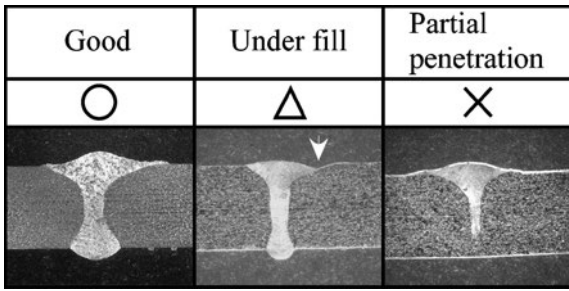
Classification of hybrid weld depending on shape of bead penetration.
